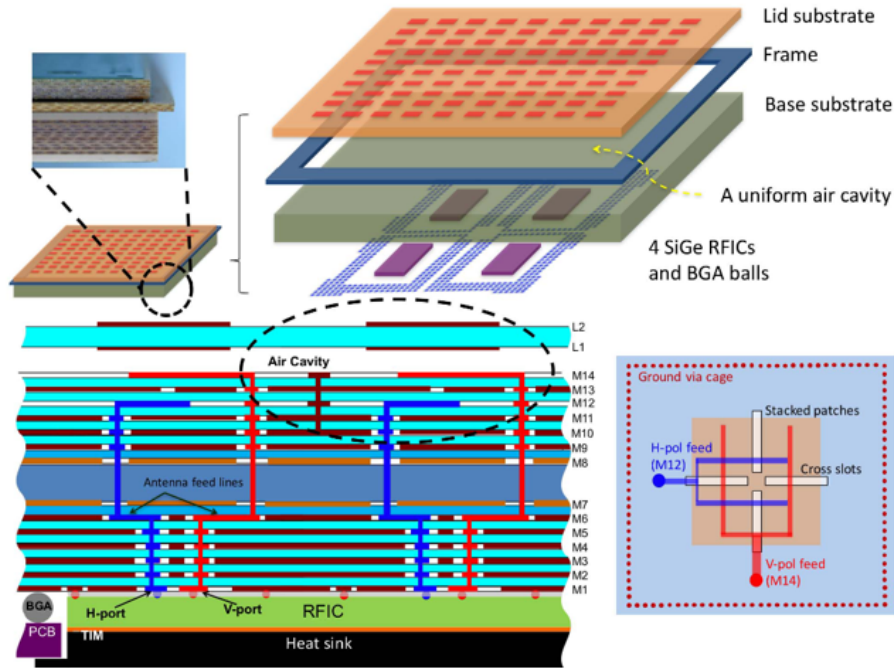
Assembly and stack up illustration for dual-polarized RF beamforming array [11].
